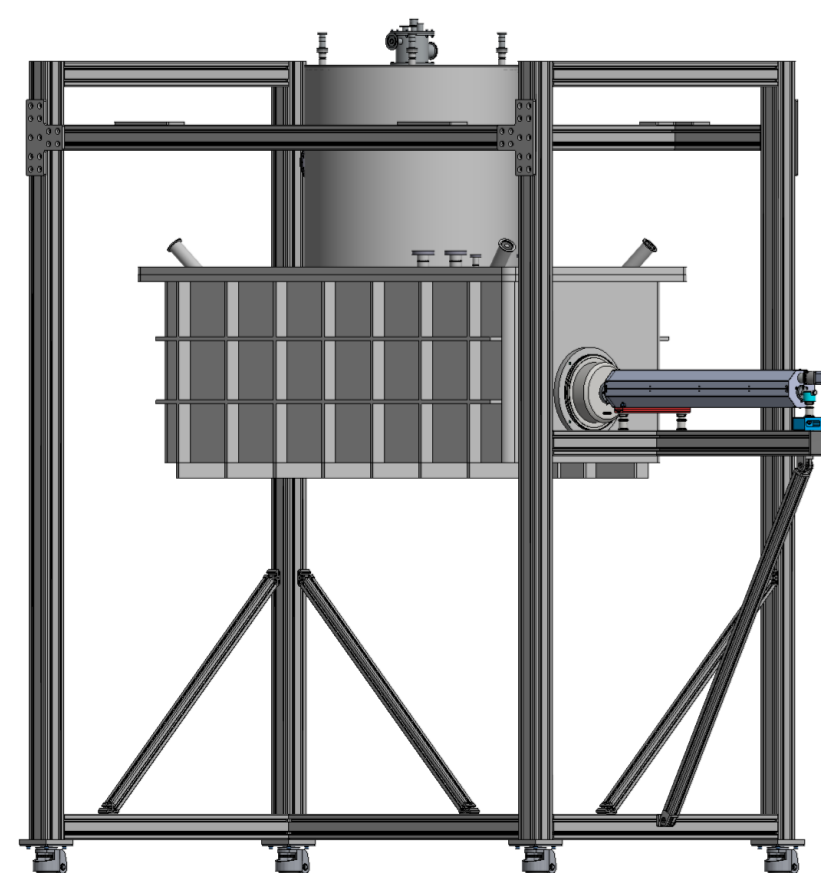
A chamber for the magnetic measurement system installed on the cryostat's outermost shielding wall [5].
